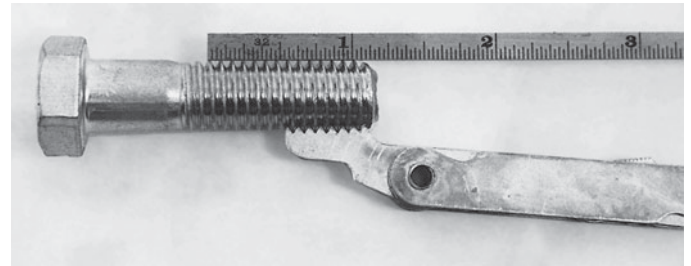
Thread pitch gauge used to measure the pitch of the thread. This bolt has 13 threads to the inch.
